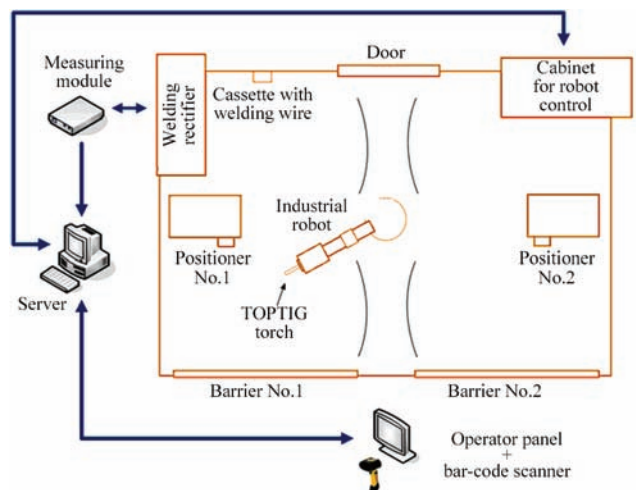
Layout of TOPTIG robotic welding station with system for monitoring the welding parameters
